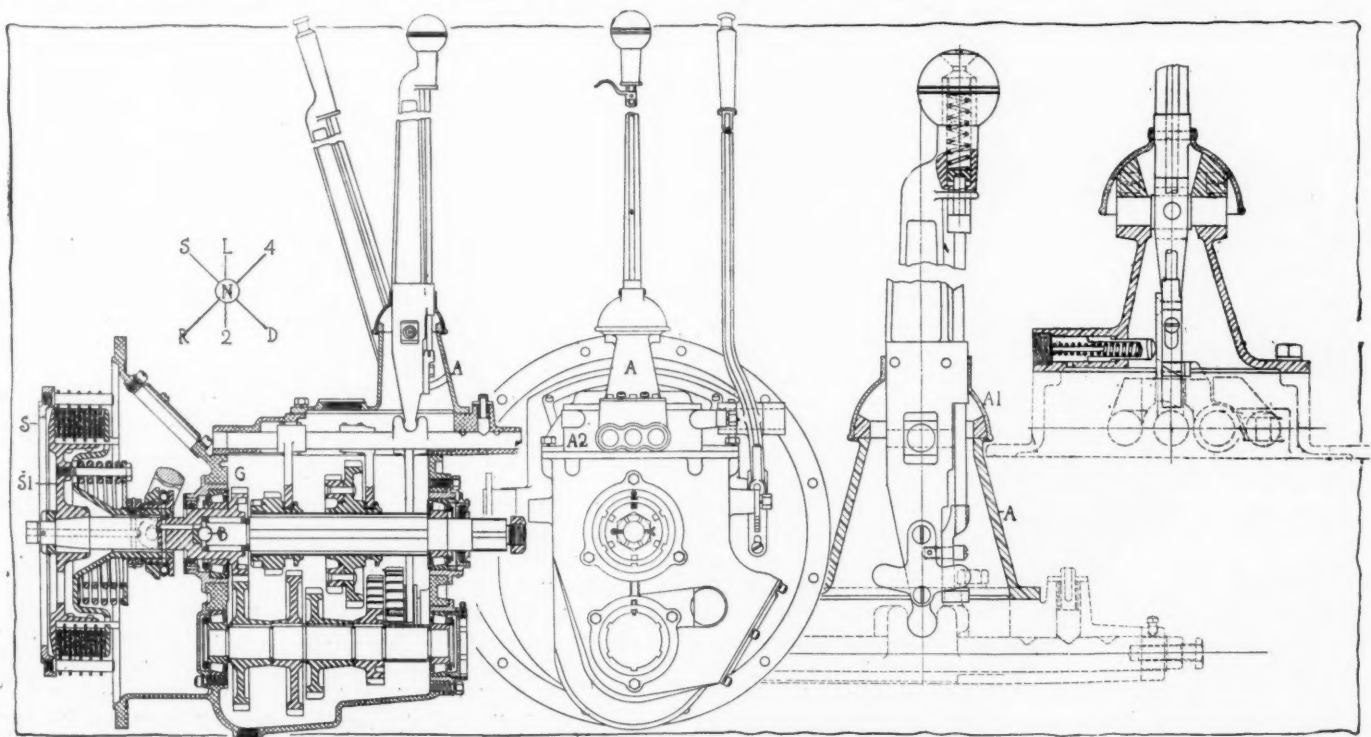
Vertical section of Abbott clutch and gearset, showing mounting of gearshift lever and protection against dust
